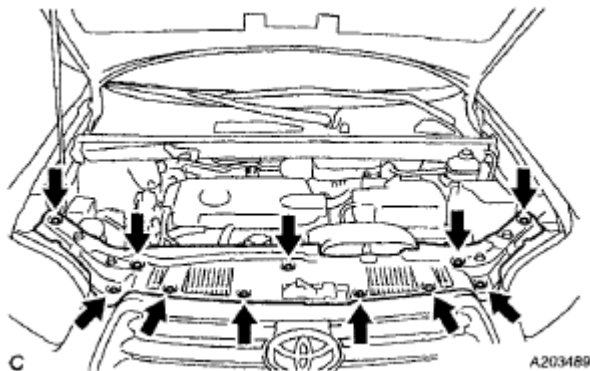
Locating Cool Air Intake Duct Seal Clips
